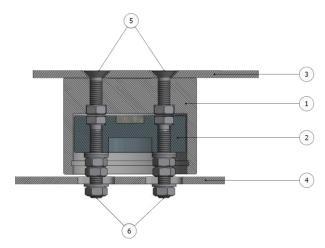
Schematic drawing of wheel angle sensor when mounted.
